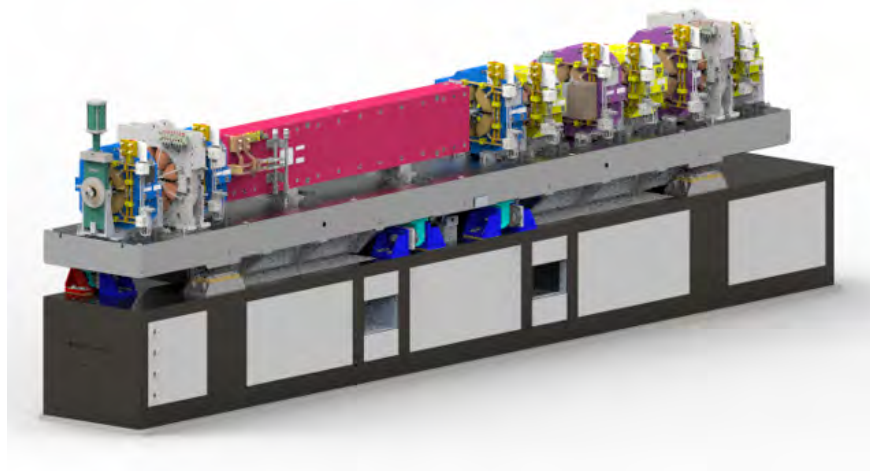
Doublet L-Bend Multiplet A (DLM-A) assembly.
